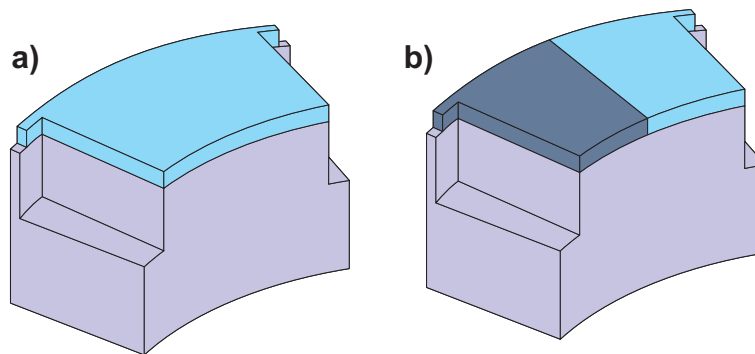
Coating geometry a) single coating, b) dual coating.
